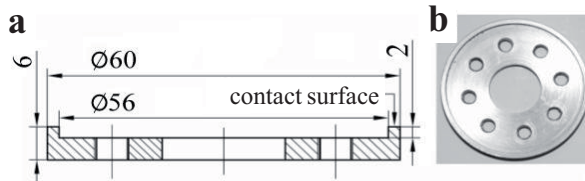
a) Test specimen with the main dimensions [mm]. b) Photograph of the specimen.
